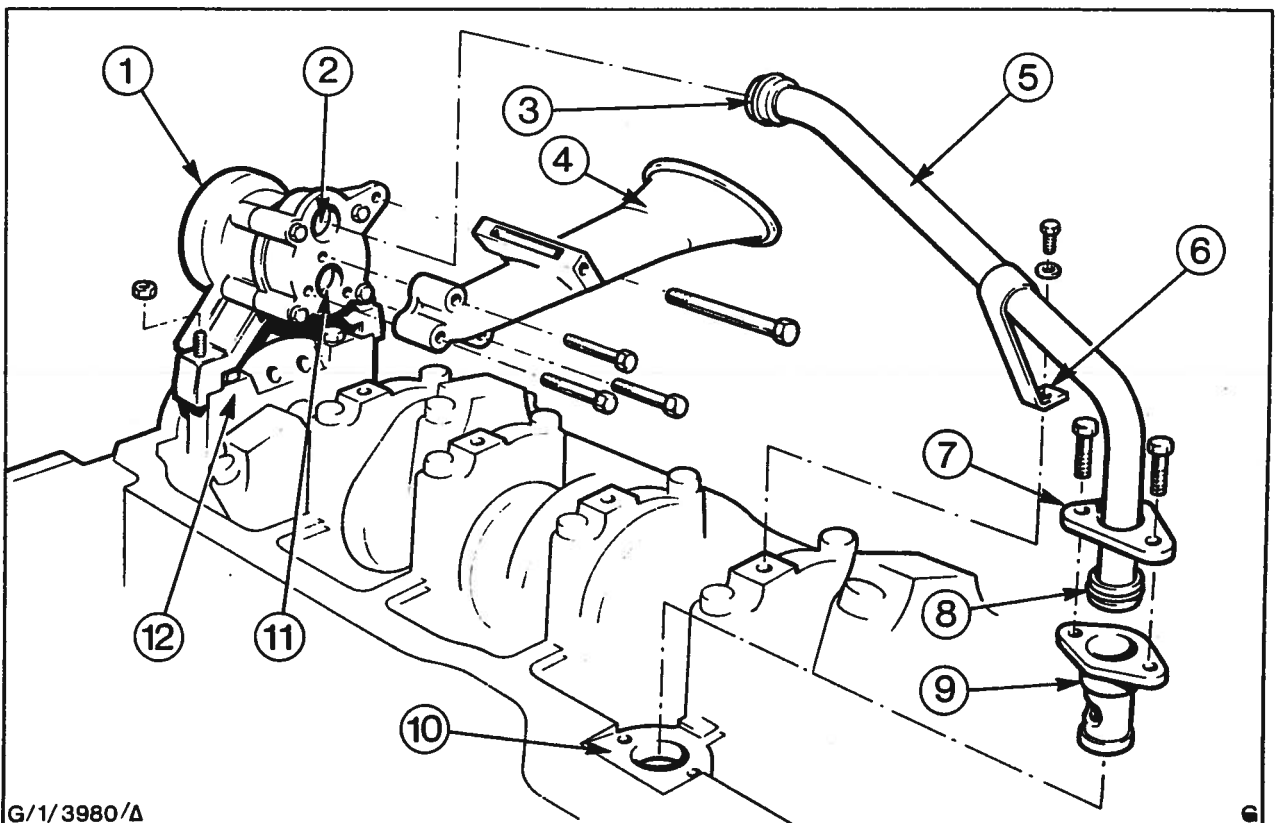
Oil Pump Removal/Replacement - 2728T Engines
